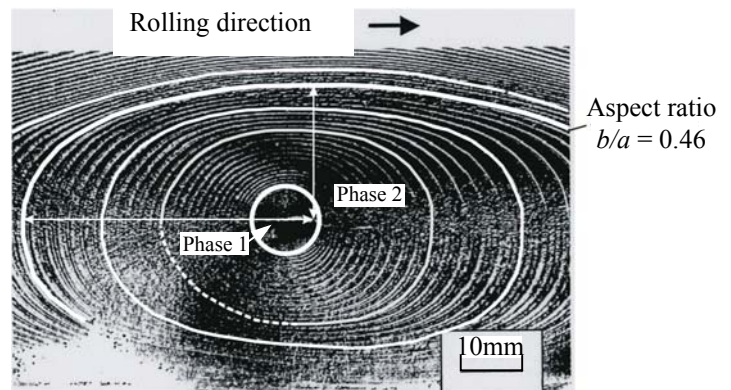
shows the fracture surface of a real railway wheel [16] reported by Beretta et al.. The fracture surface is parallel to the external surface of the wheel. The origin of the fracture surface is a Al_2O_3 cluster inclusions aligned in the rolling direction. Firstly, the fatigue crack propagates in not only in the rolling direction but also in the direction perpendicular to the rolling direction and eventually become a circular shape crack (Phase 1). This stage of crack growth is promoted by Mode I under the residual tensile stress produced by the cyclic compression load. After this stage, the crack grows by Mode II and Mode III (Phase 2). Eventually, the planar elliptical crack grows toward the aspect ratio 0.49 under cyclic shear stress. However, the aspect ratio continued decreasing as shown in Fig. 10 (b). The cause for the decrease in the aspect ratio b/a smaller than 0.49 was assumed to be the friction between crack surfaces and the effect of friction was investigated by the FEM in the following.
